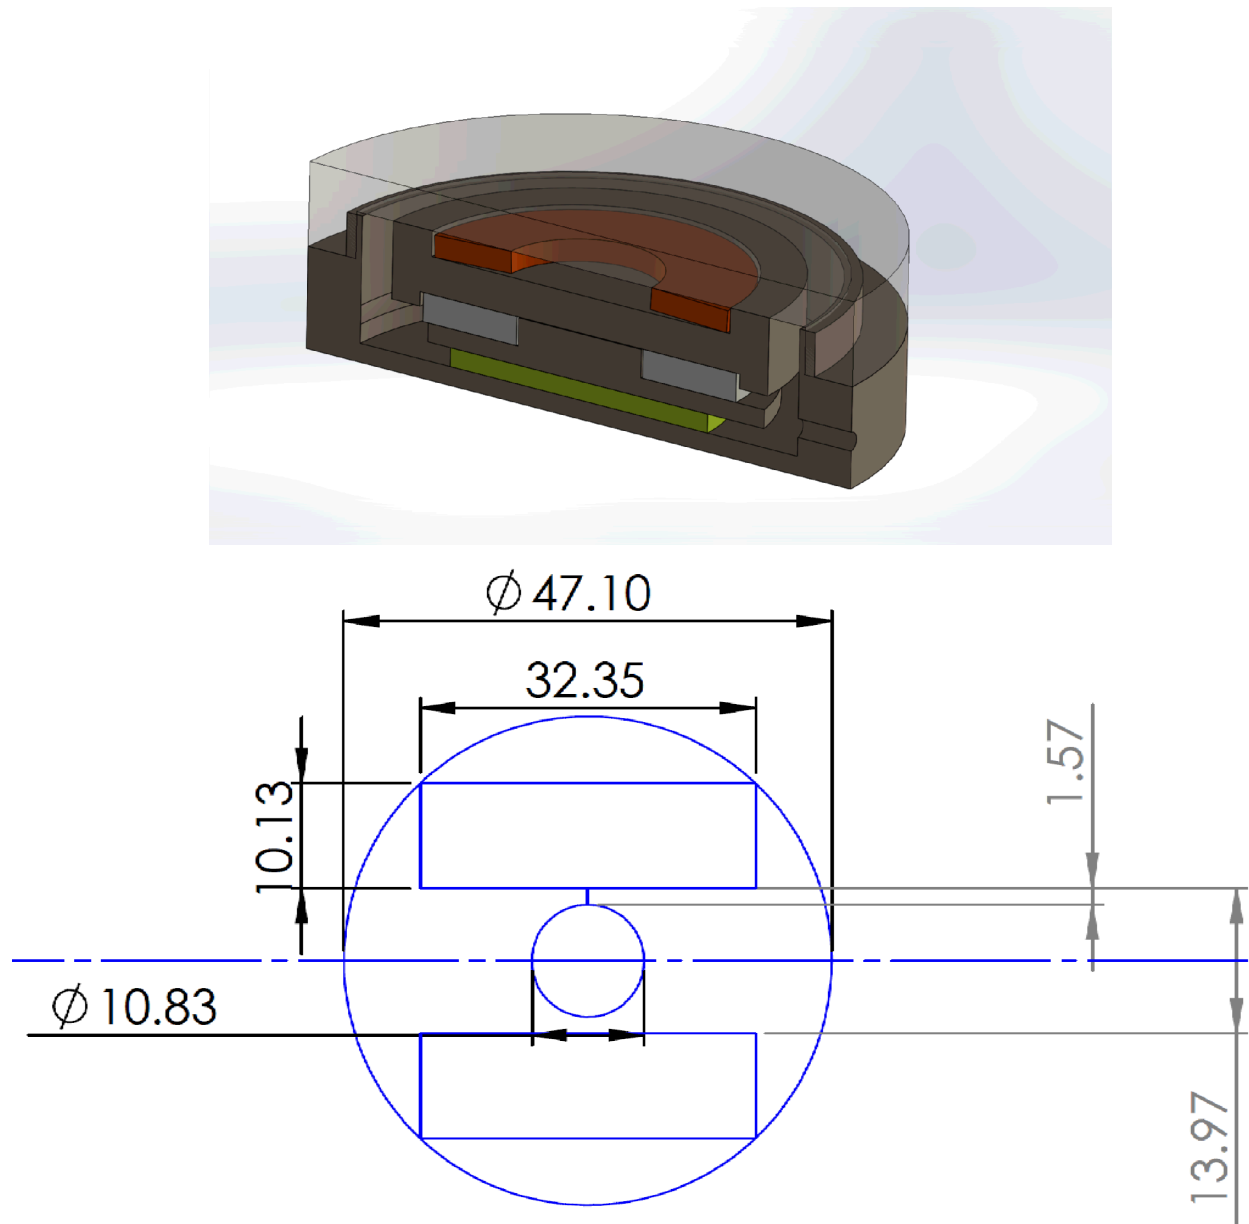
Cutaway CAD drawing of sensor prototypic design and dimensioned plan view.
